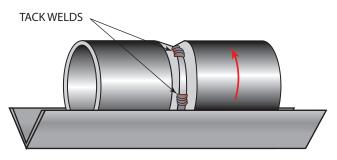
Aligning pipe for tack welding.
